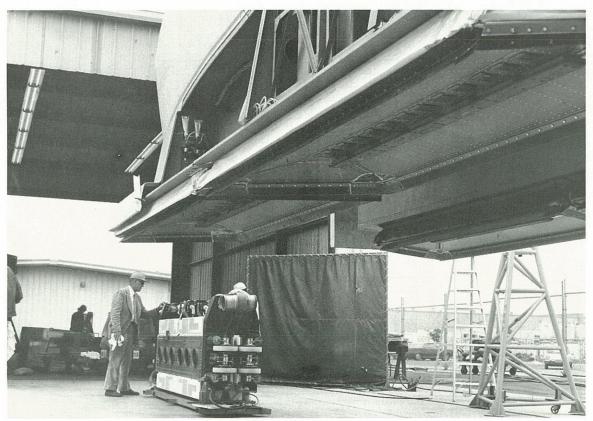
Linear Induction Motor (LIM) Ready for Installation at Aft End
